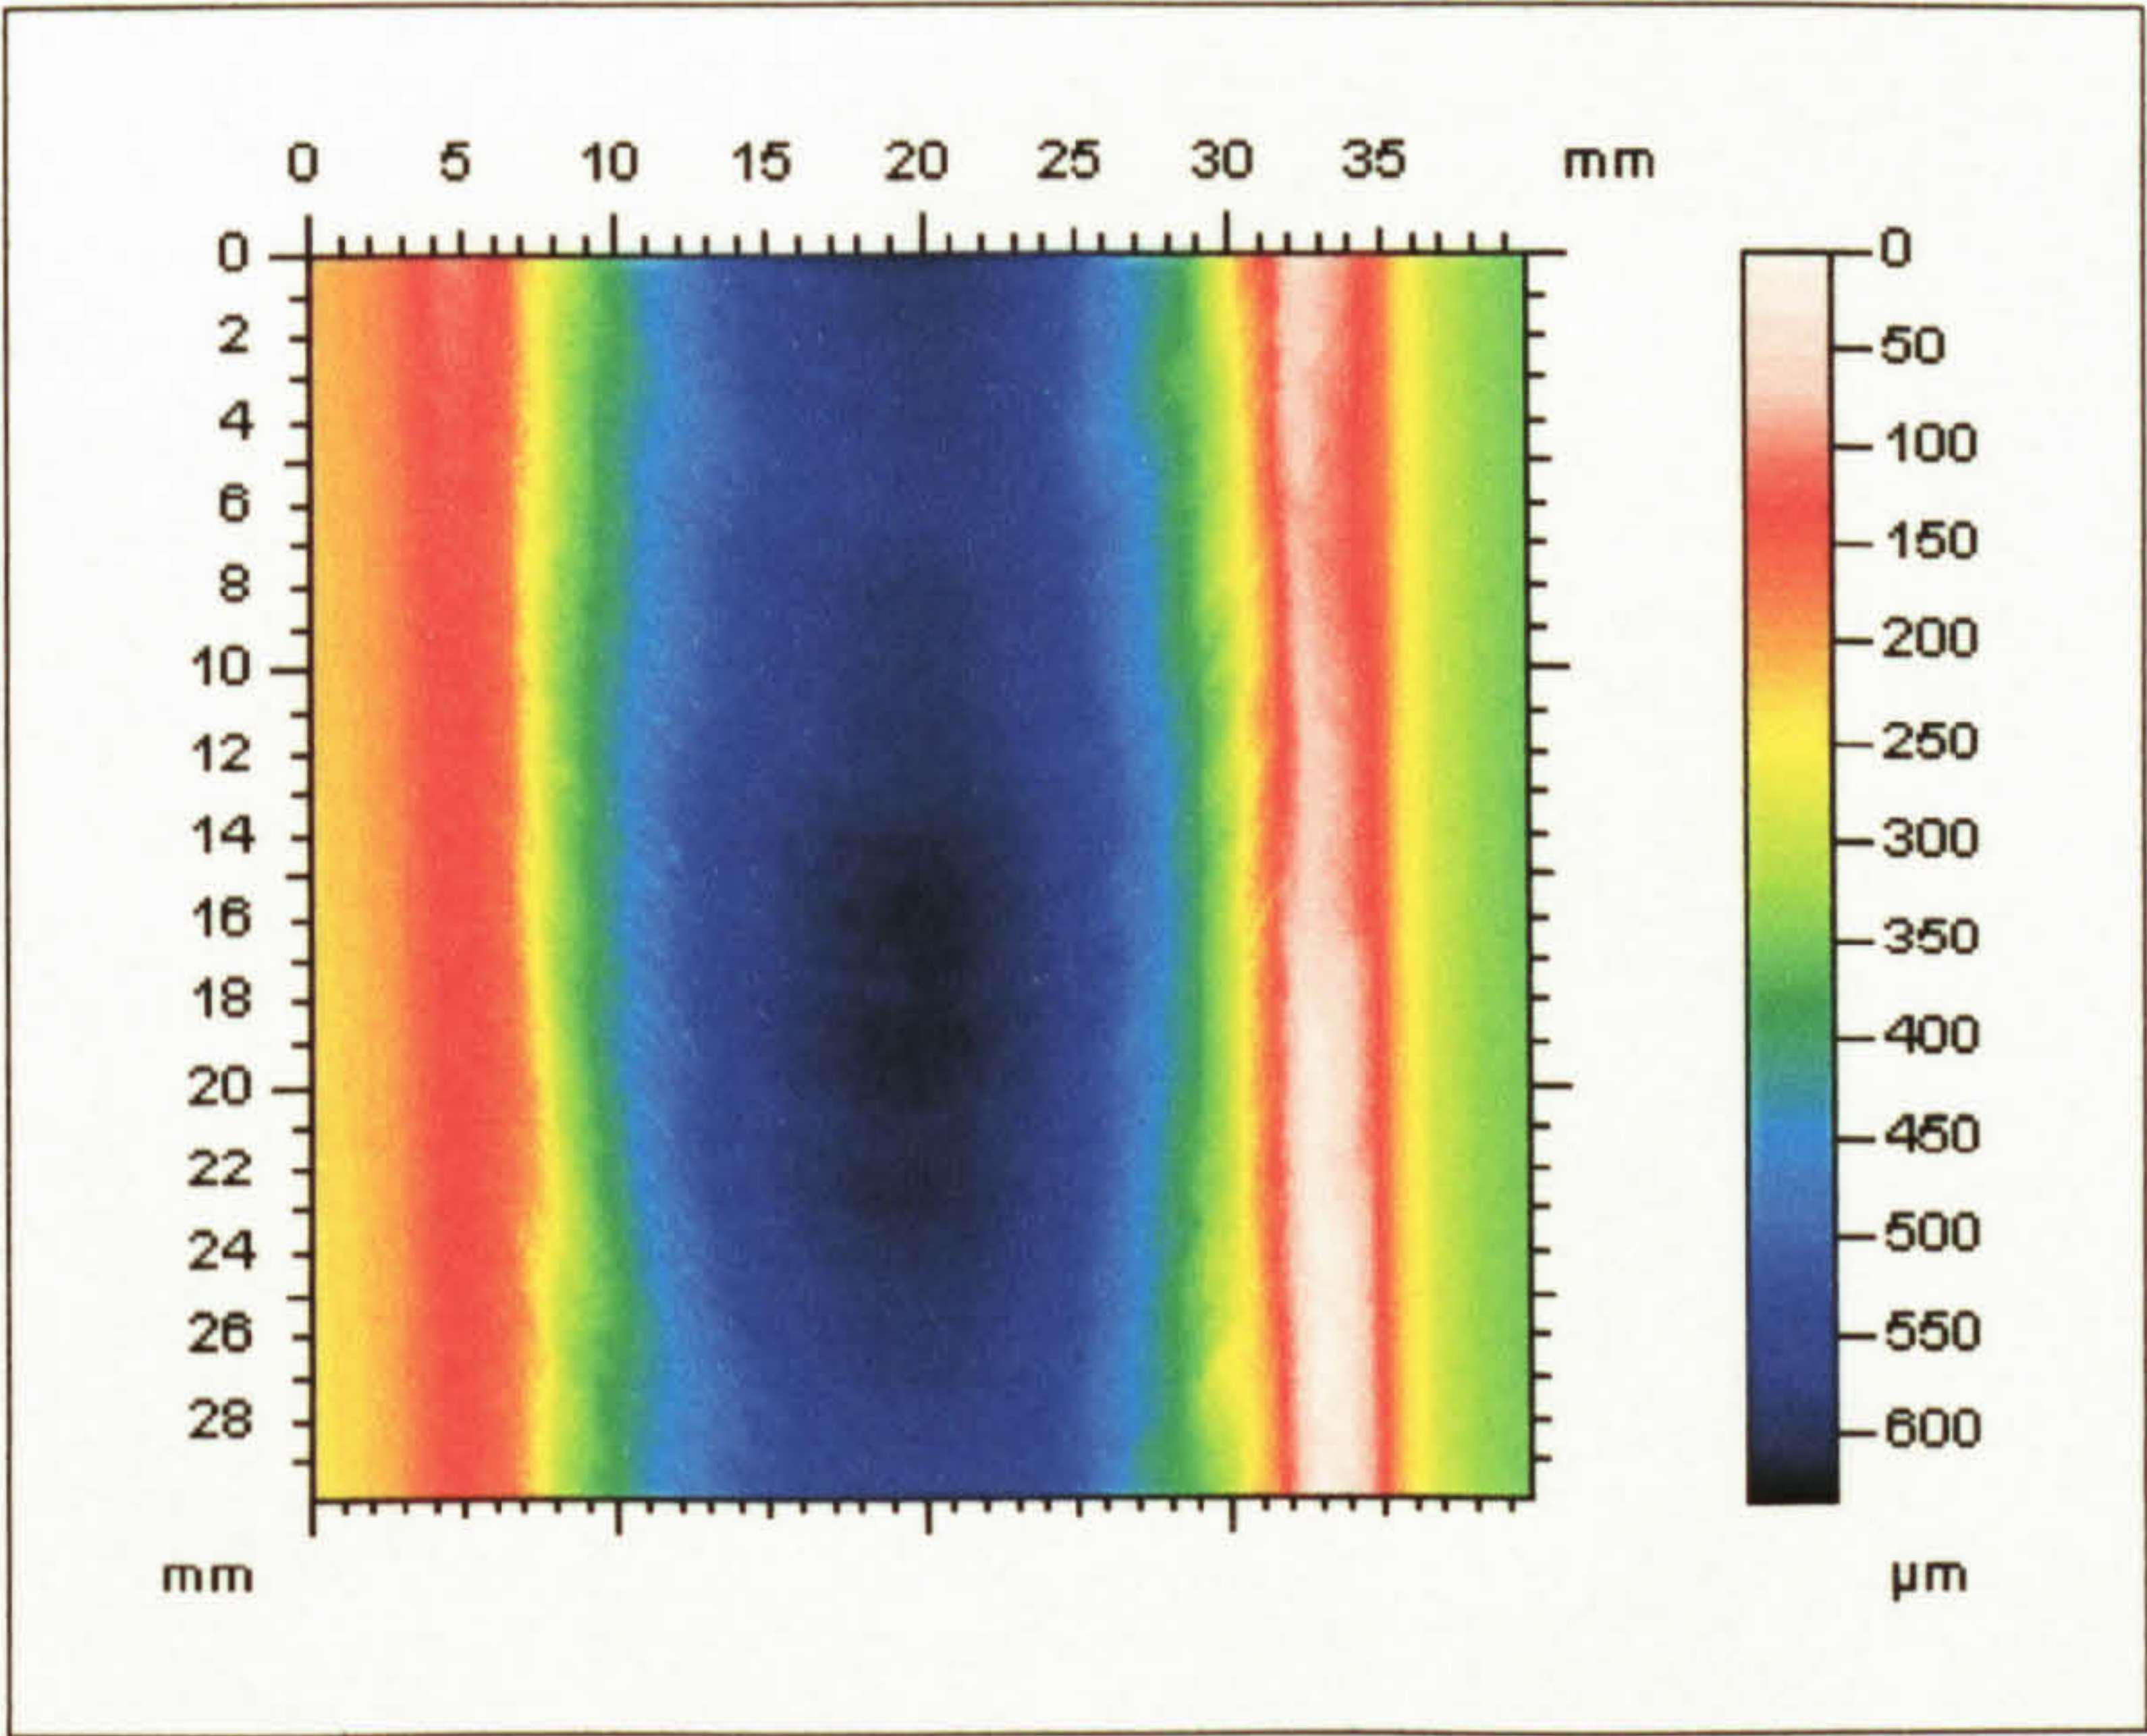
Friction band surface of a FS SP weld exhibiting the circular grooves.
